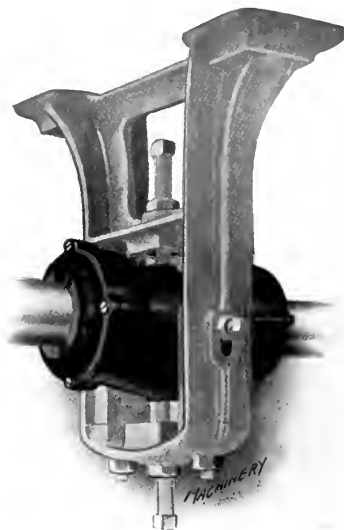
The Fafnir Ball Bearing Box for Lineshaft Hangers
